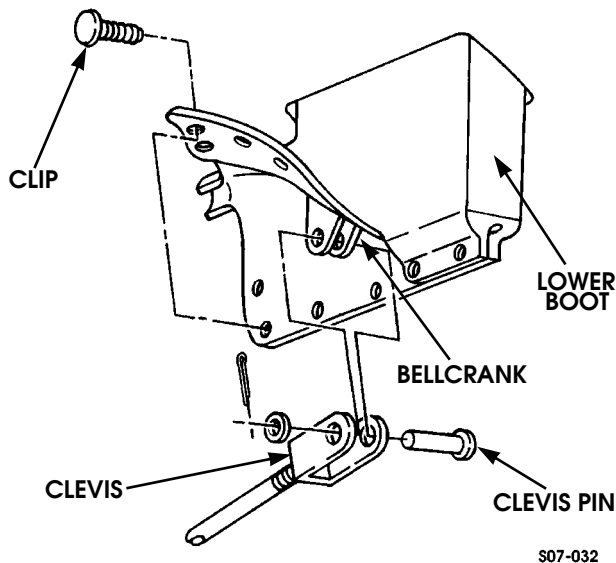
Parking Brake Rod Attachment at Hand Lever
